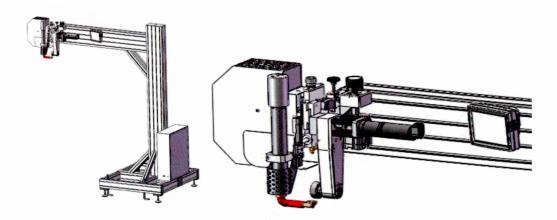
Cad Model Of Pfaff Single Hot Air Welding Machine.
